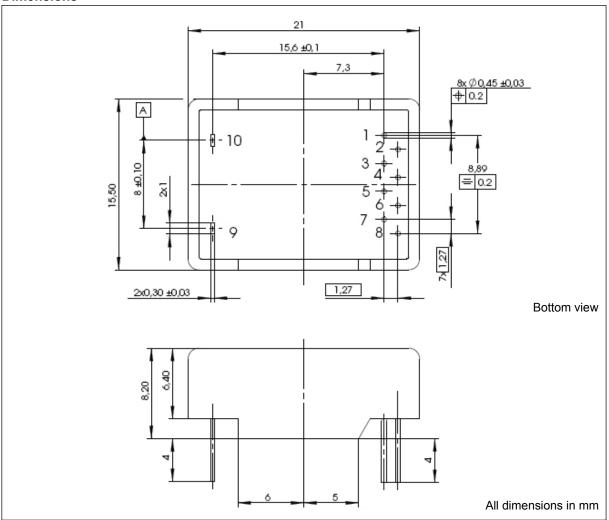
Package outline of THT-housing. Tolerance ± 0.2 mm unless otherwise specified.
